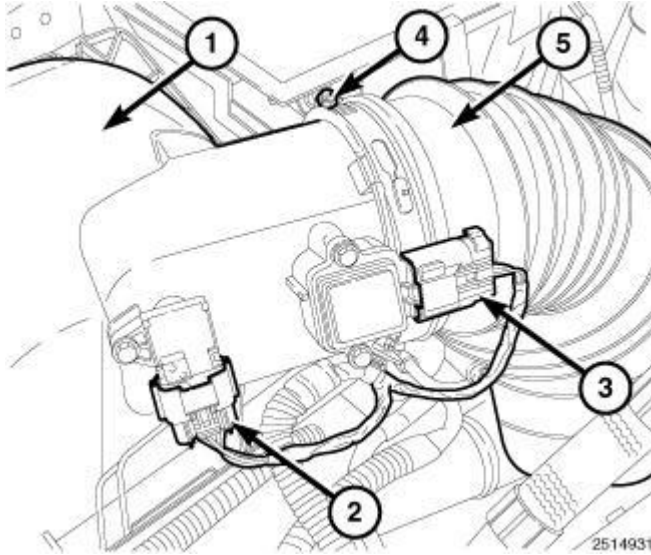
Identifying MAF Sensor, TBAP Sensor, Intake Air Tube, Air Cleaner Body & Clamp
